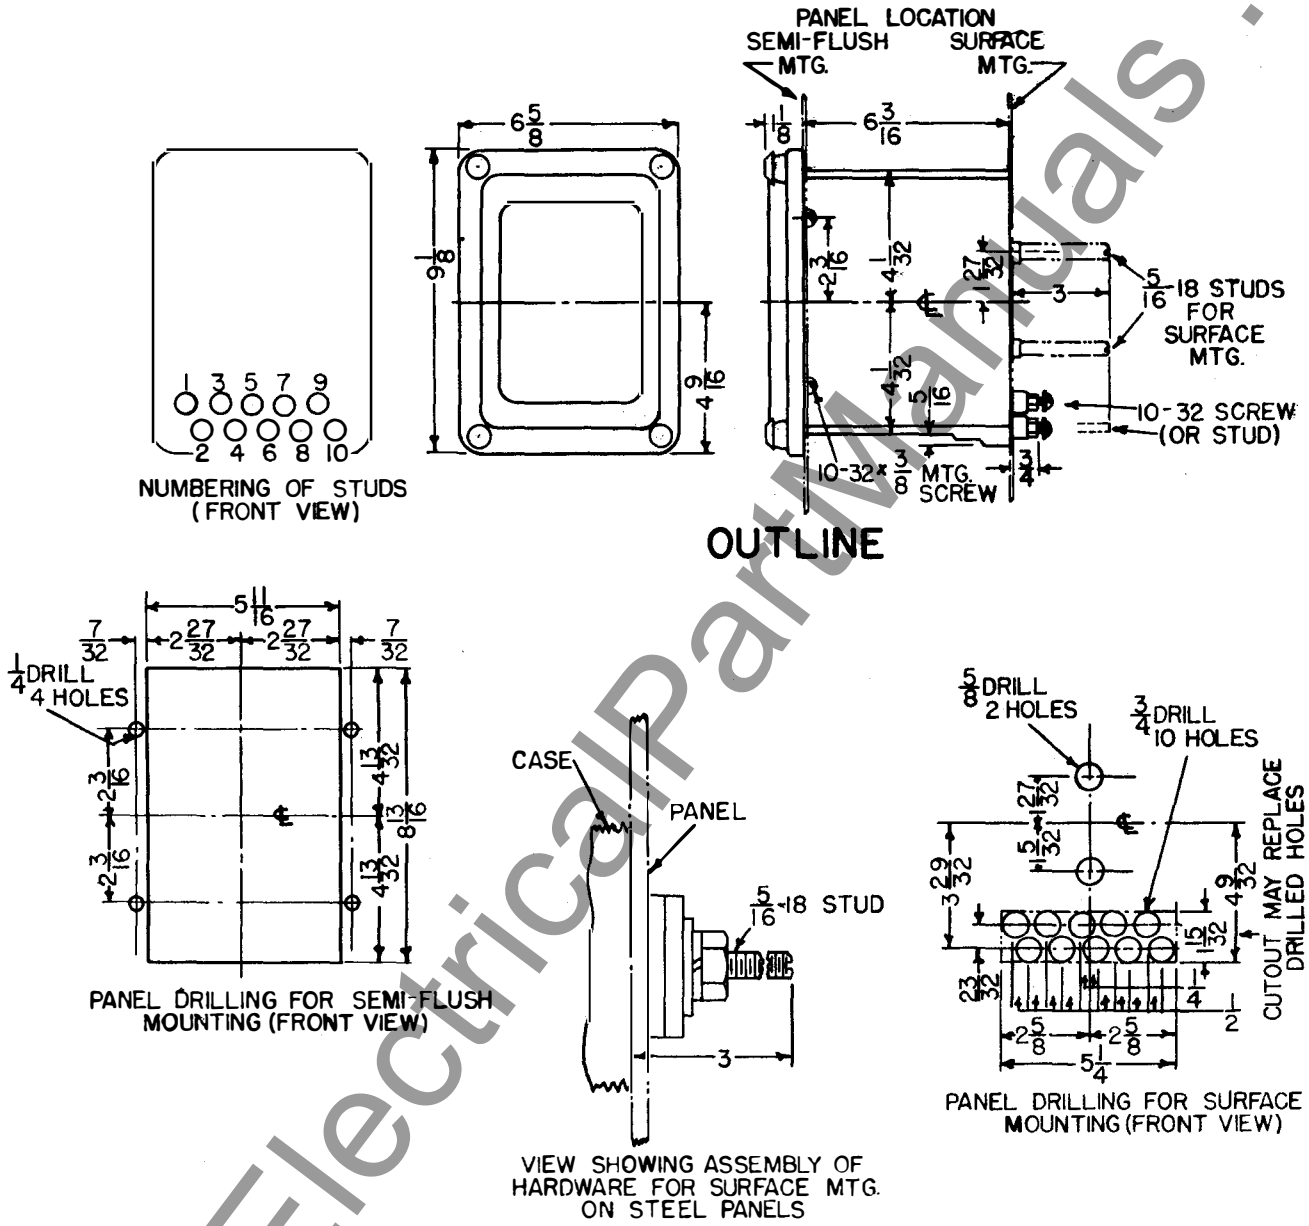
Outline and Panel Drilling Dimensions for Type IJD52A and IJD53C Relays
